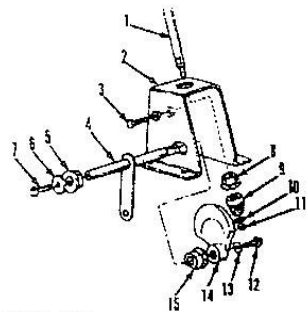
Exploded view of steering gear assembly used on all 700-800 Series except Models 700-701-702-703-704-705-706-714-715.
